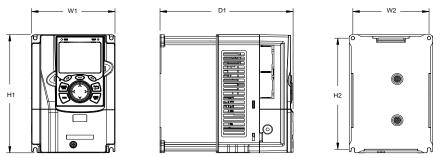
Wall installation diagram of VFDs of 575V 0.75-18.5kW
